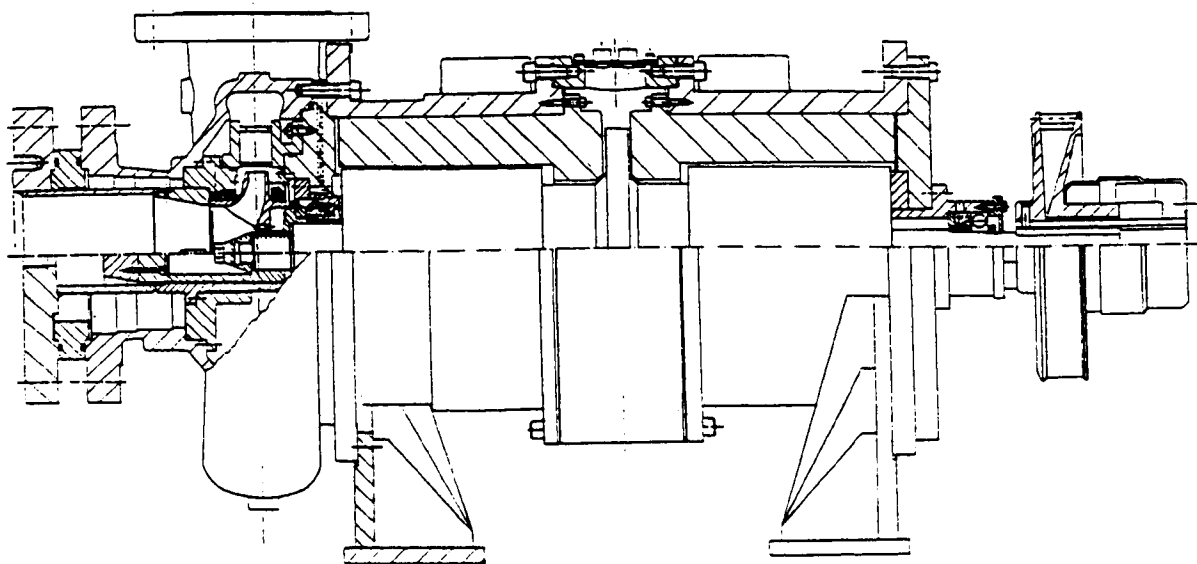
Sectional drawing of a AMB Component Tester used for identification of physical parameters
